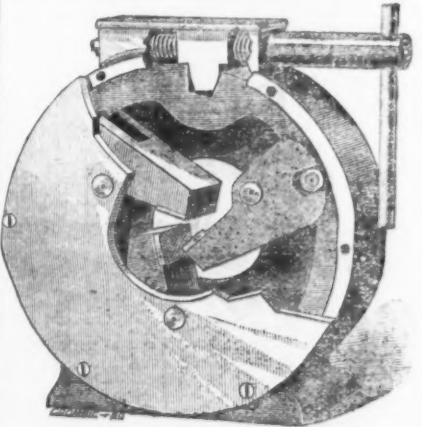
Enlarged Detail Through the Centering Chuck.
